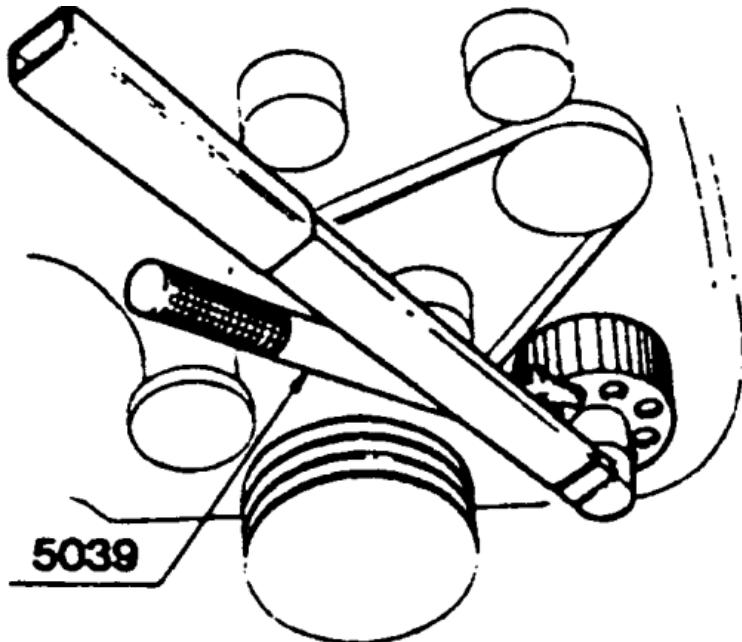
Use counterhold tool 5039 or equivalent to remove the pump pulley
